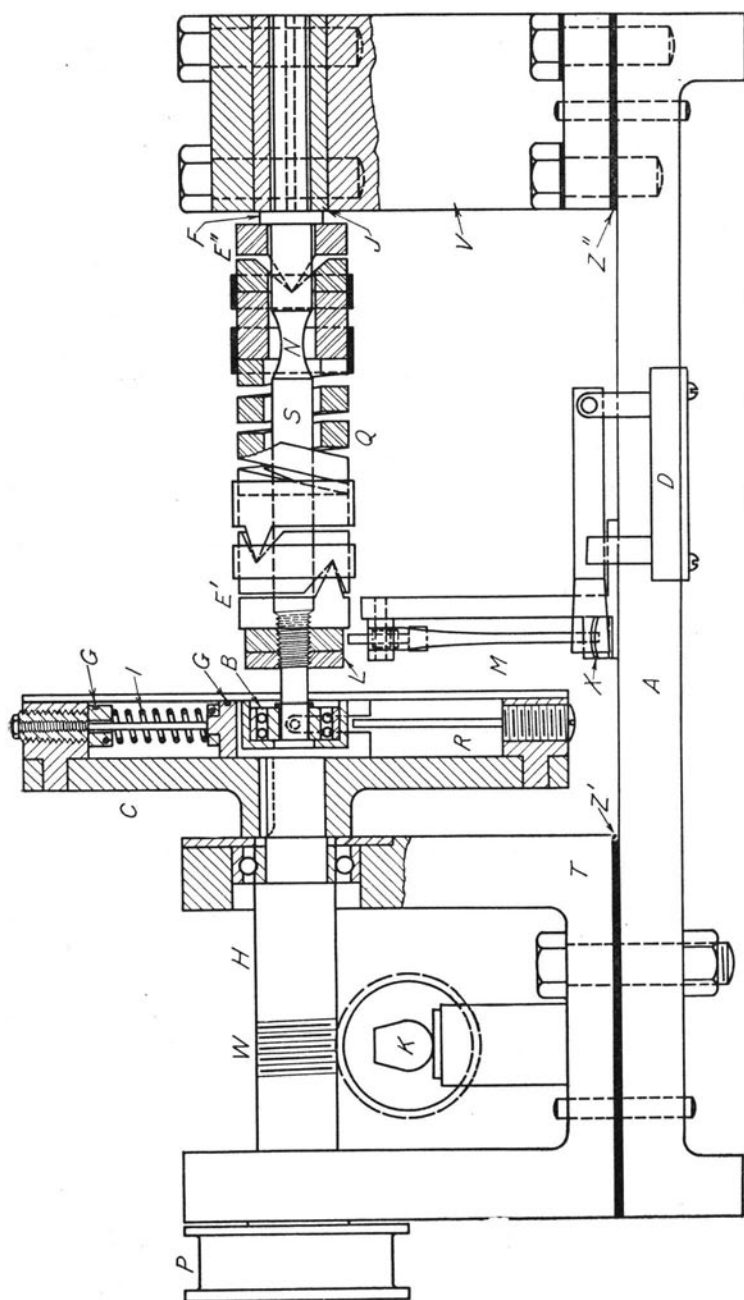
TESTING MACHINE FOR FATIGUE TESTS WITH VARYING RANGE OF STRESS
